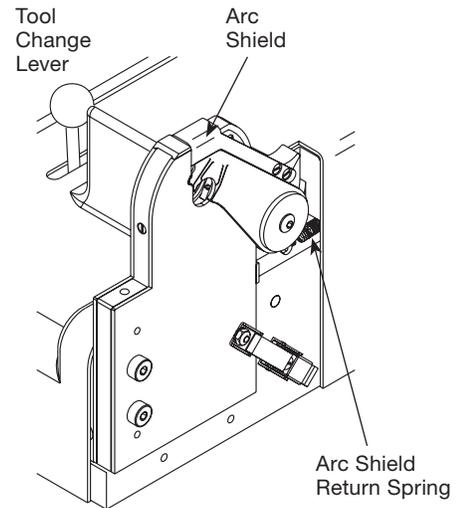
Removing the Arc Shield Return Spring from the Movable Plate Assembly
